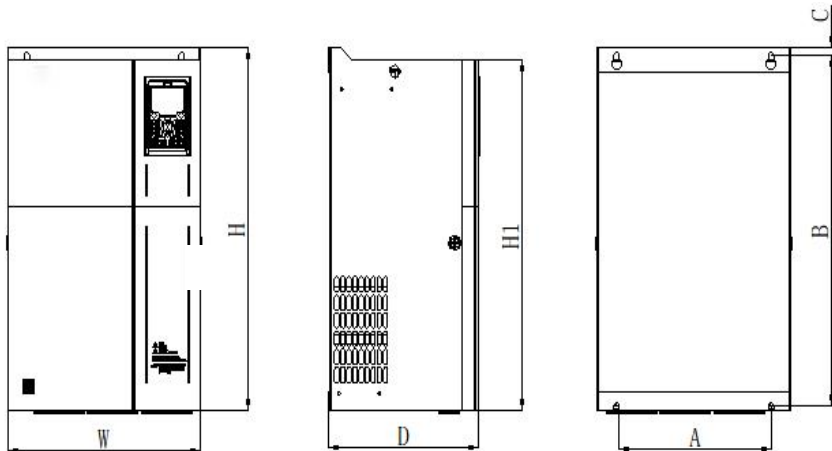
45~132KW VFD External Dimensions and Installation Dimensions Diagram
